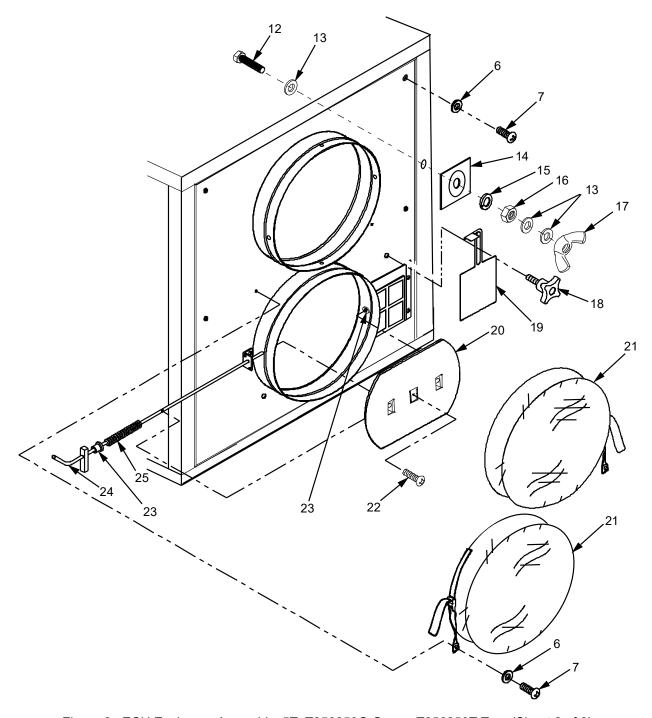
ECU Enclosure Assembly, 5T, T256250G Green, T256250T Tan, (Sheet 2 of 2).
